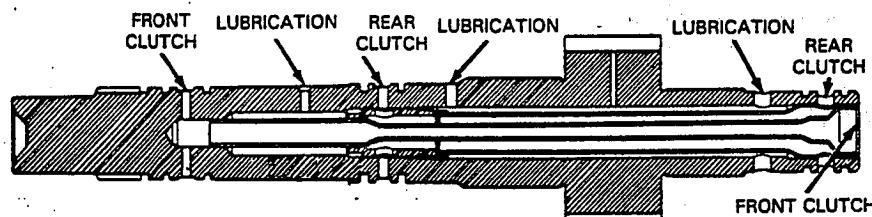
Sun gear shaft showing drilled passageways. (Ford)
